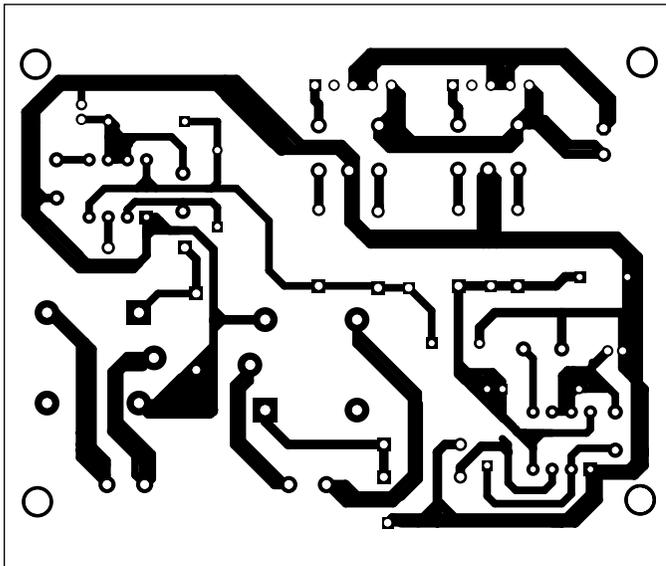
Actual-size PCB of the 3-phase electric motor controller
